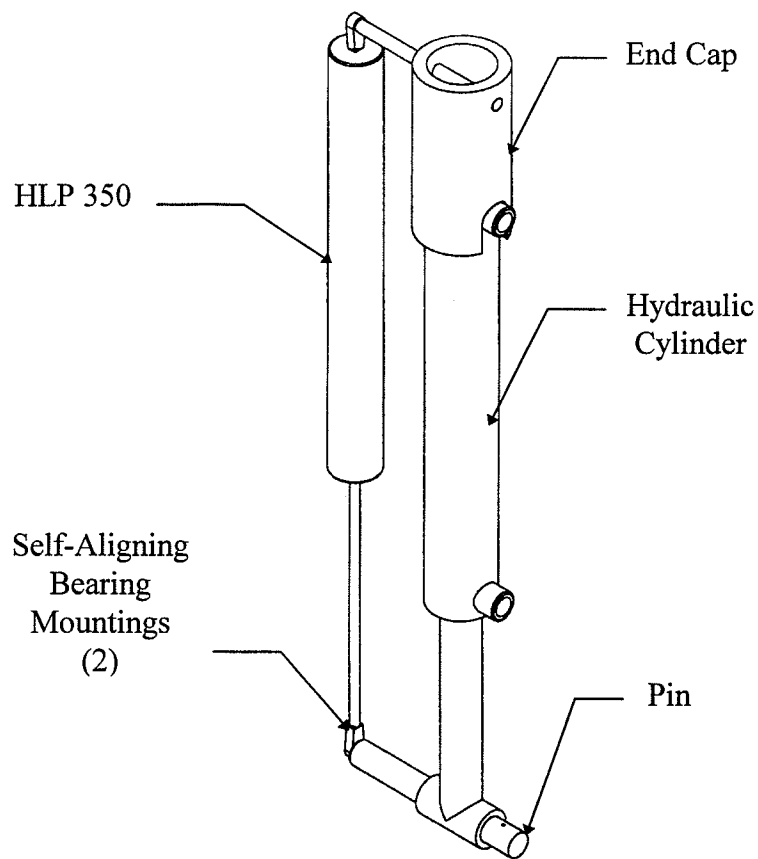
Isometric view of the HPL 350 mounted onto the spreader's cylinder.
